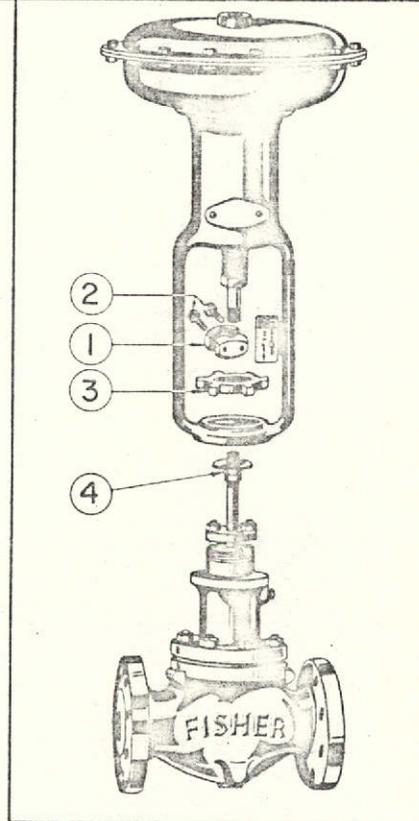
Exploded view showing how diaphragm actuator mounts on easy-e body. (Type 657 illustrated) Numbered parts are stem connector (1), cap screws (2), yoke locknut (3), and stem locknuts (4).
